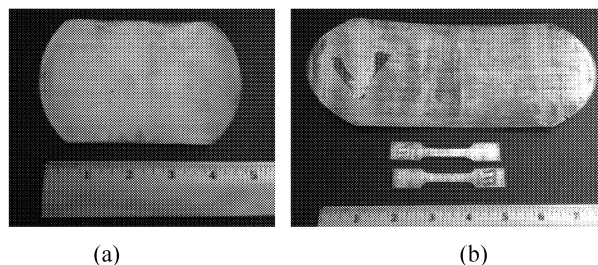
Photographs showing (a) a 0.64cm thick plate used for rolling trials, and (b) a rolled plate and the tensile specimens machined from a rolled plate.
